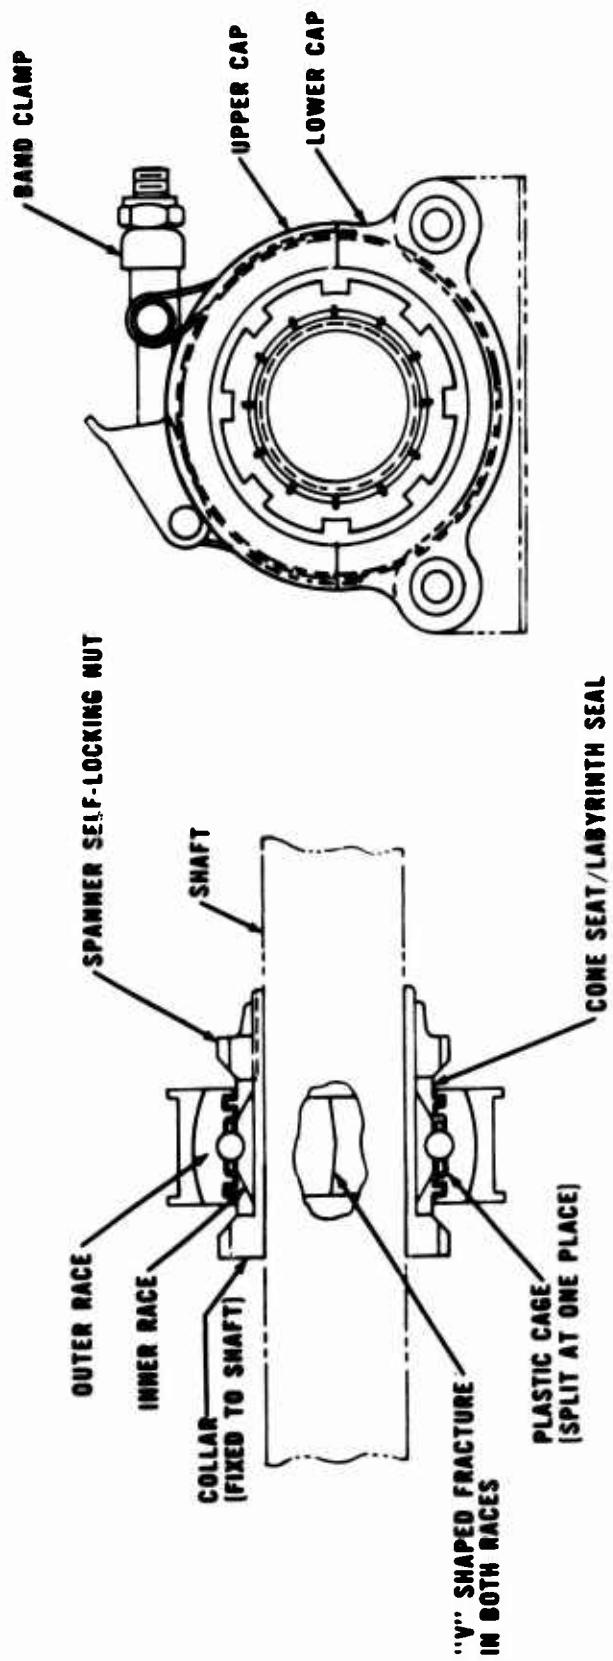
Candidate Number 5, Split Hanger Bearing Design.
